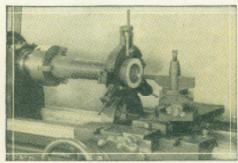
Cutting an Internal Thread in a Large Piece of Work.
